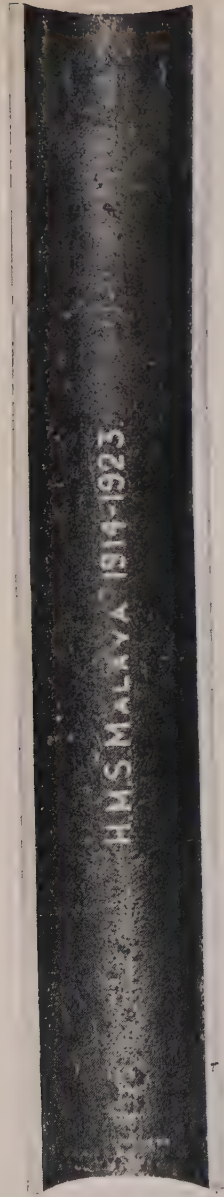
FIG. A. Photograph of the interior of a boiler tube removed from H.M.S. "Malaya."
